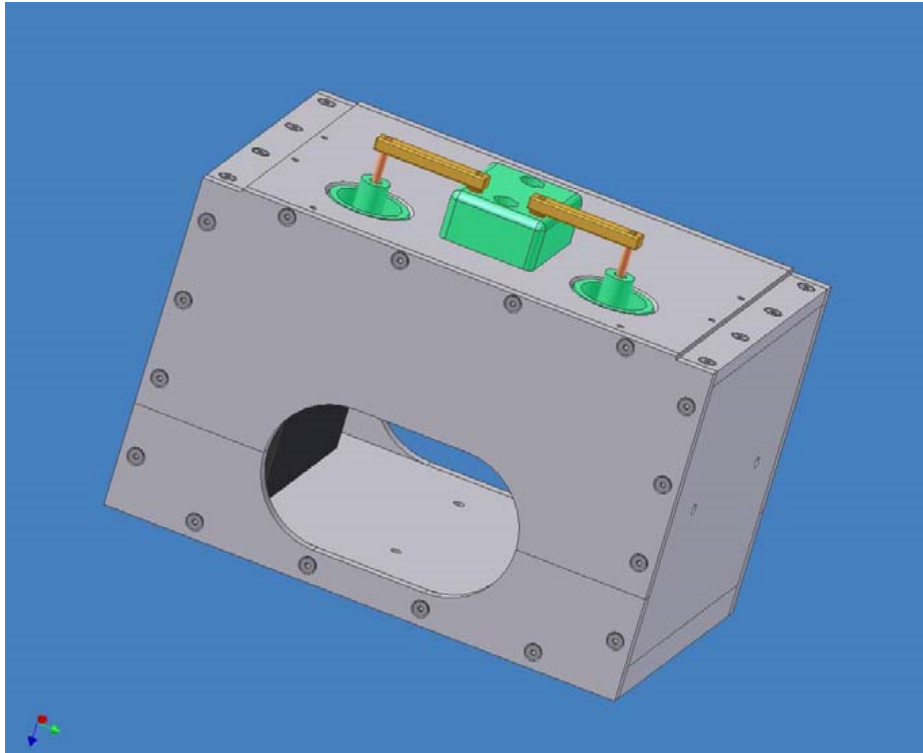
Dump bumper magnet module assembled. Both 6-turns and 12-turns magnets look alike when assembled.
